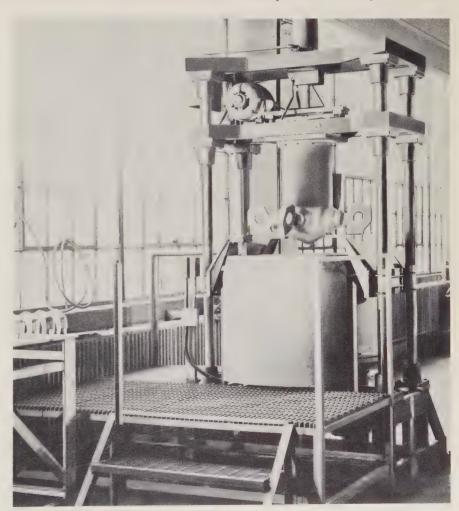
This experimental Single Station Vertical Gyrofinisher consists of a vertical drum containing the abrasive mixtures with an air cylinder attached to the machine head to lower parts into the abrasive. Spindles mounted on the geared head at 90° to the vertical drum can be revolved clockwise or counterclockwise. Bolted to the spindles are fixtures to hold the parts for finishing.
